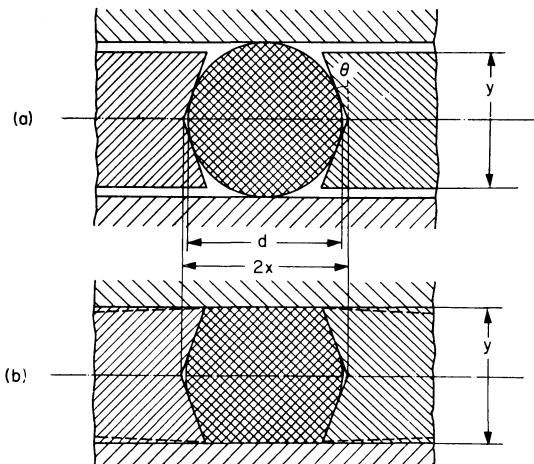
Spacer seal with V-shaped grooves: (a) open; (b) closed (after Burrows¹⁸⁵)
